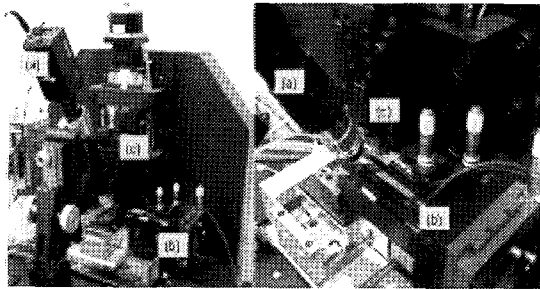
Micro hole punching system : (a) vision part (b) punch-die alignment part (c) micro hole fabrication part
